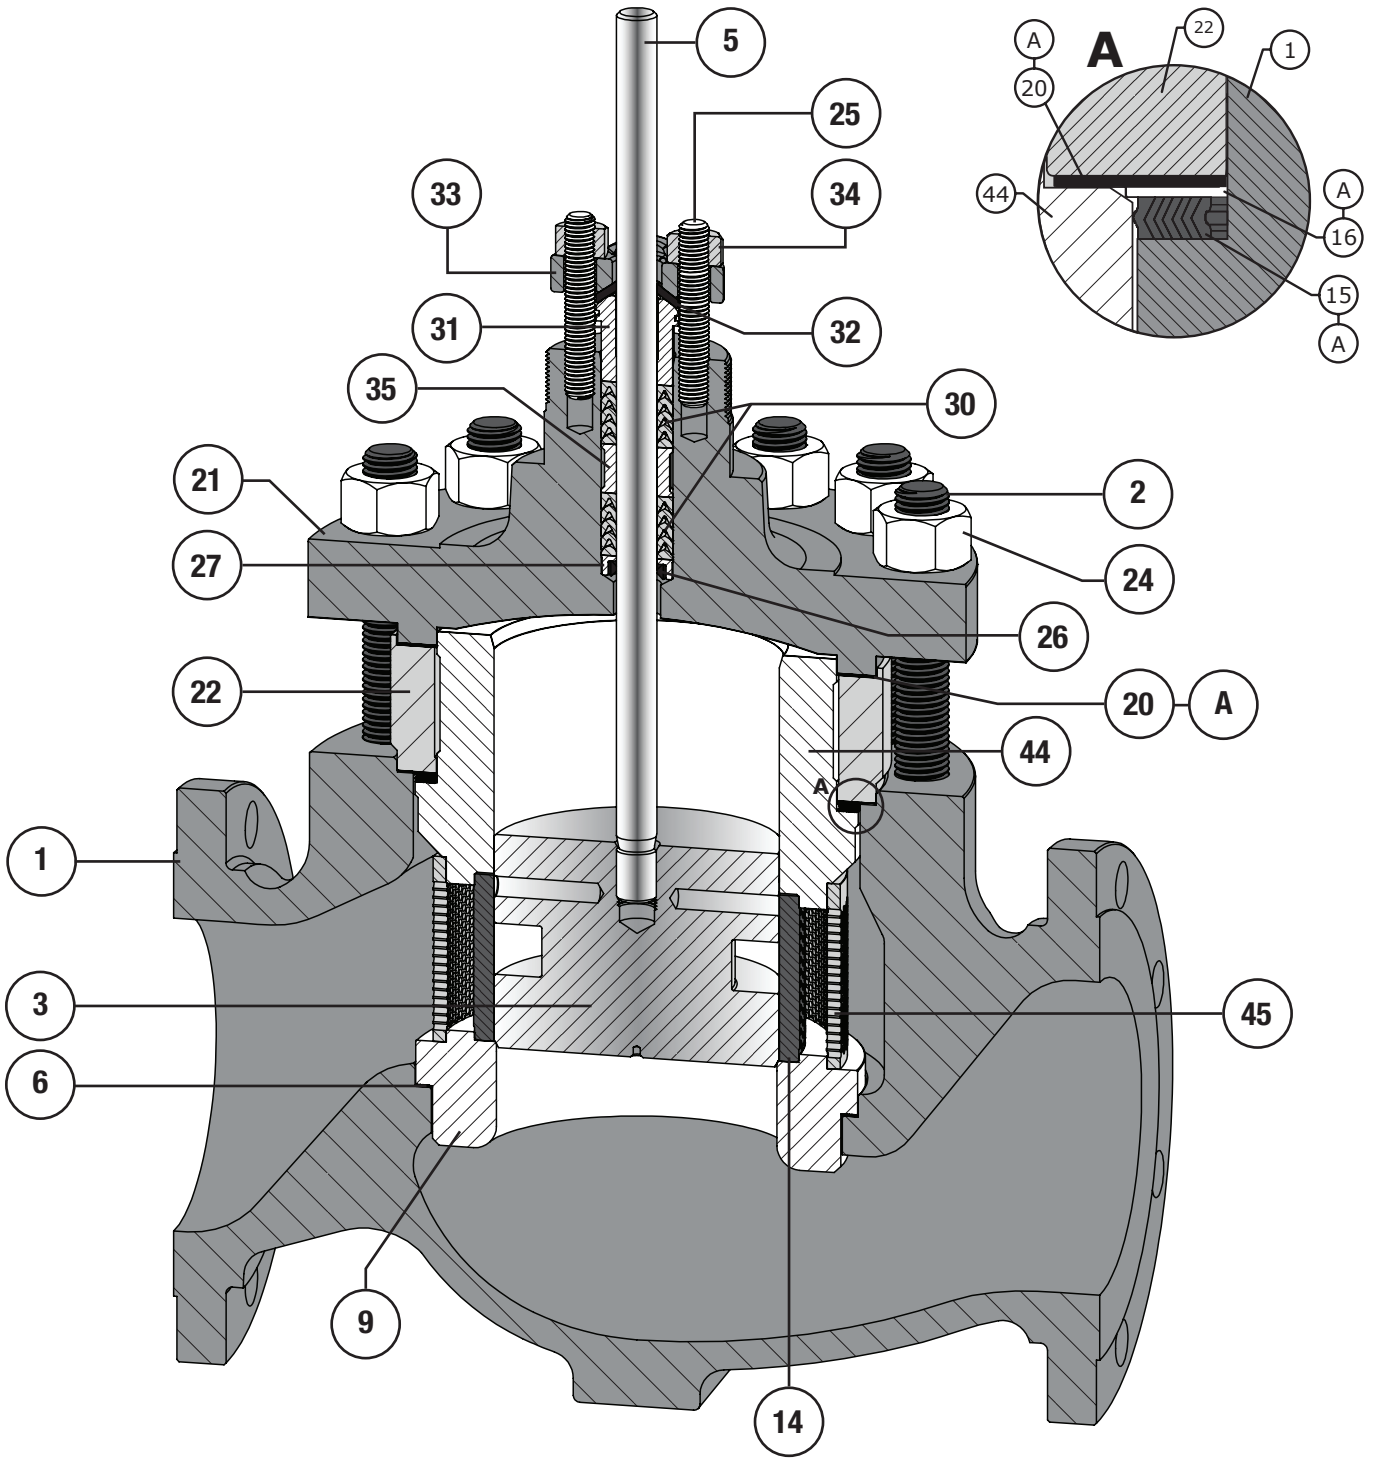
Low-Noise Valve Assembly with Bonnet Spacer Diagram
